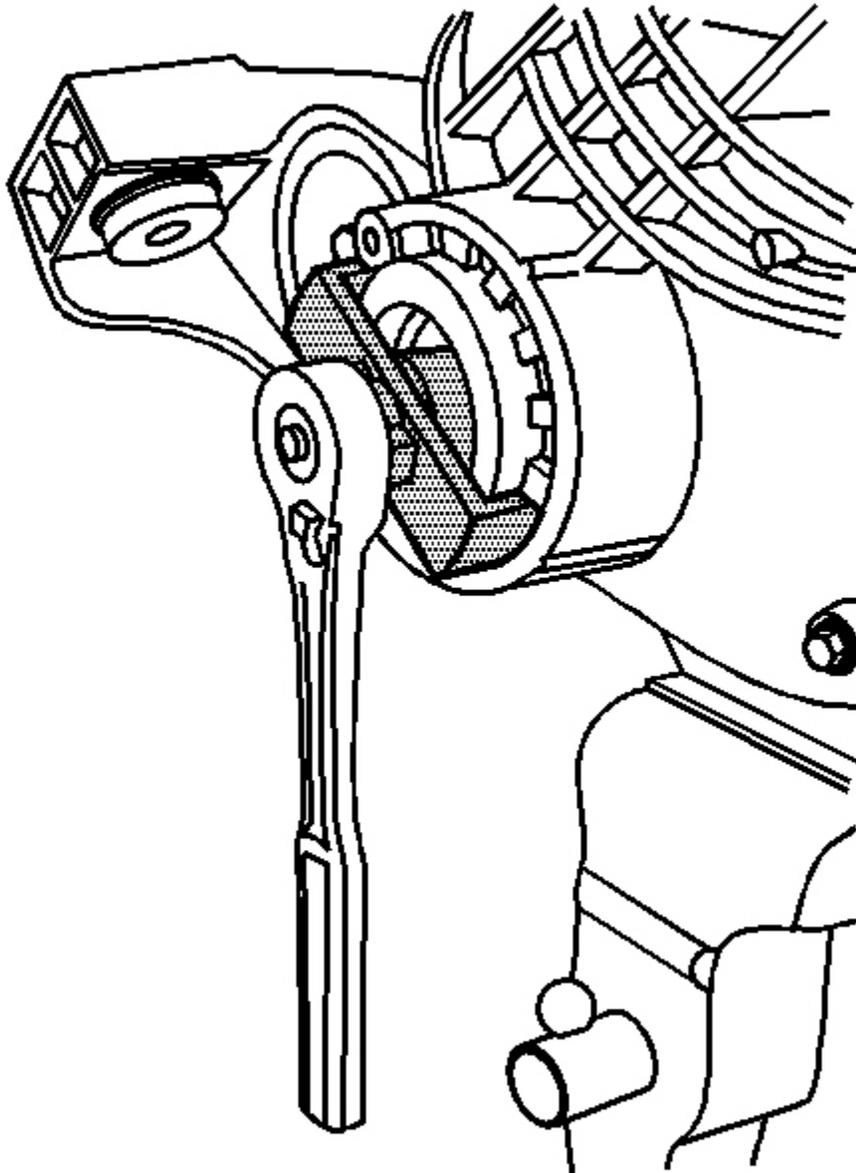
Turning Left Side Differential Adjuster Nut Sleeve Using J 36615
